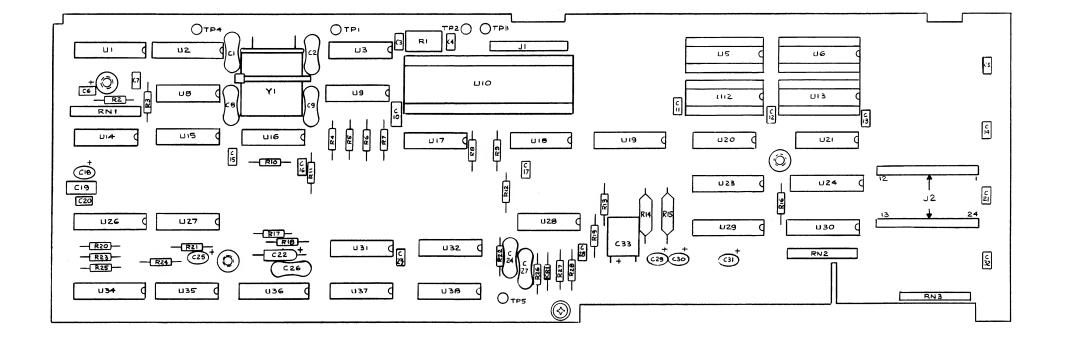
A6 Controller PCB Assembly— Single PCB Version (cont)
